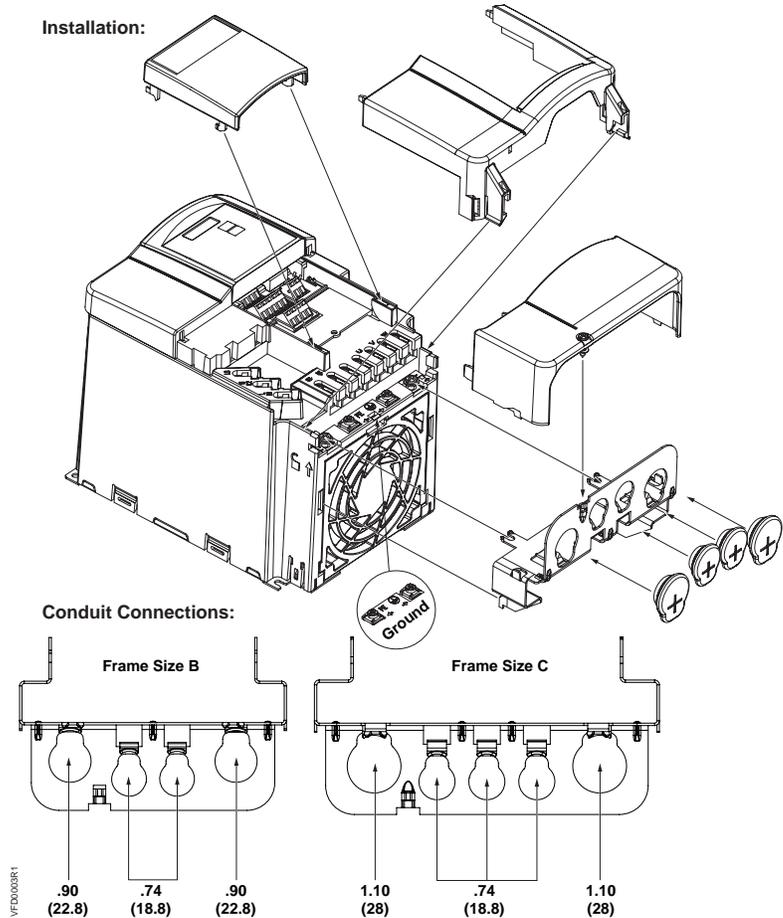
Gland Plate Installation and Conduit Connection Diameters for Frame Size B and C.
